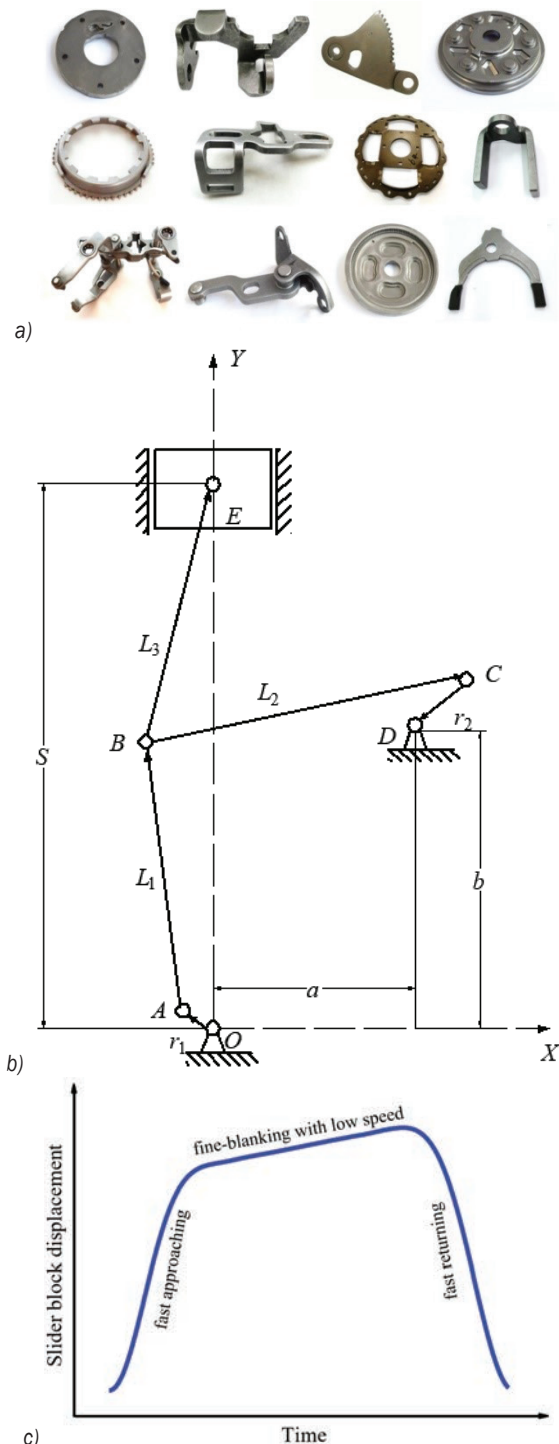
a) The mid-thick sheet metal parts fabricated by FB process, b) the mechanical construction of the main driving system of the high-speed FB press, and c) the slide block stroke diagram
